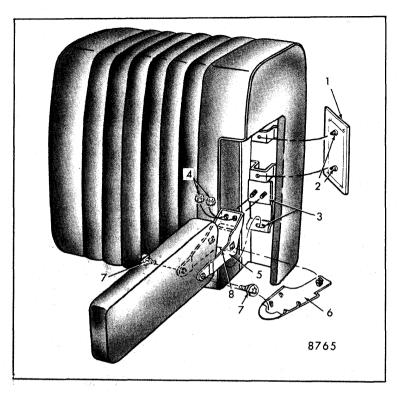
Passenger and Driver Seat Back Center Armrest Installation
